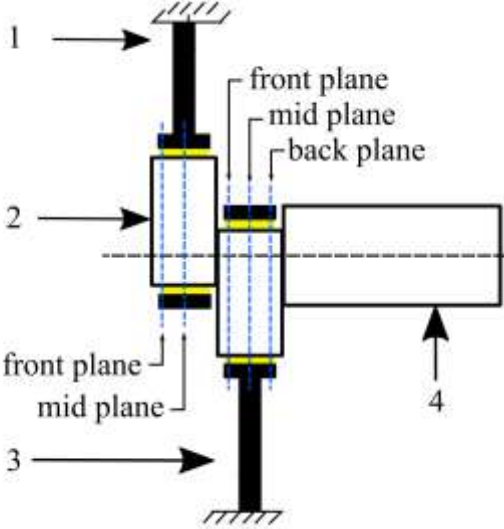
Renault RS connecting rod thermocouples planes locations: 1. Left Connecting rod; 2. Journal, 3. Right Connecting rod; 4. Shaft
